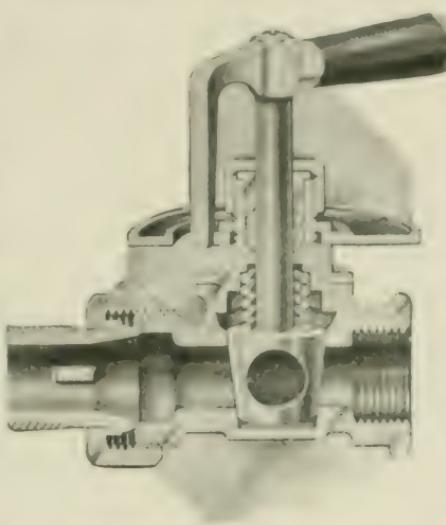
Quick-opening regulating valve by National Radiator Company.
